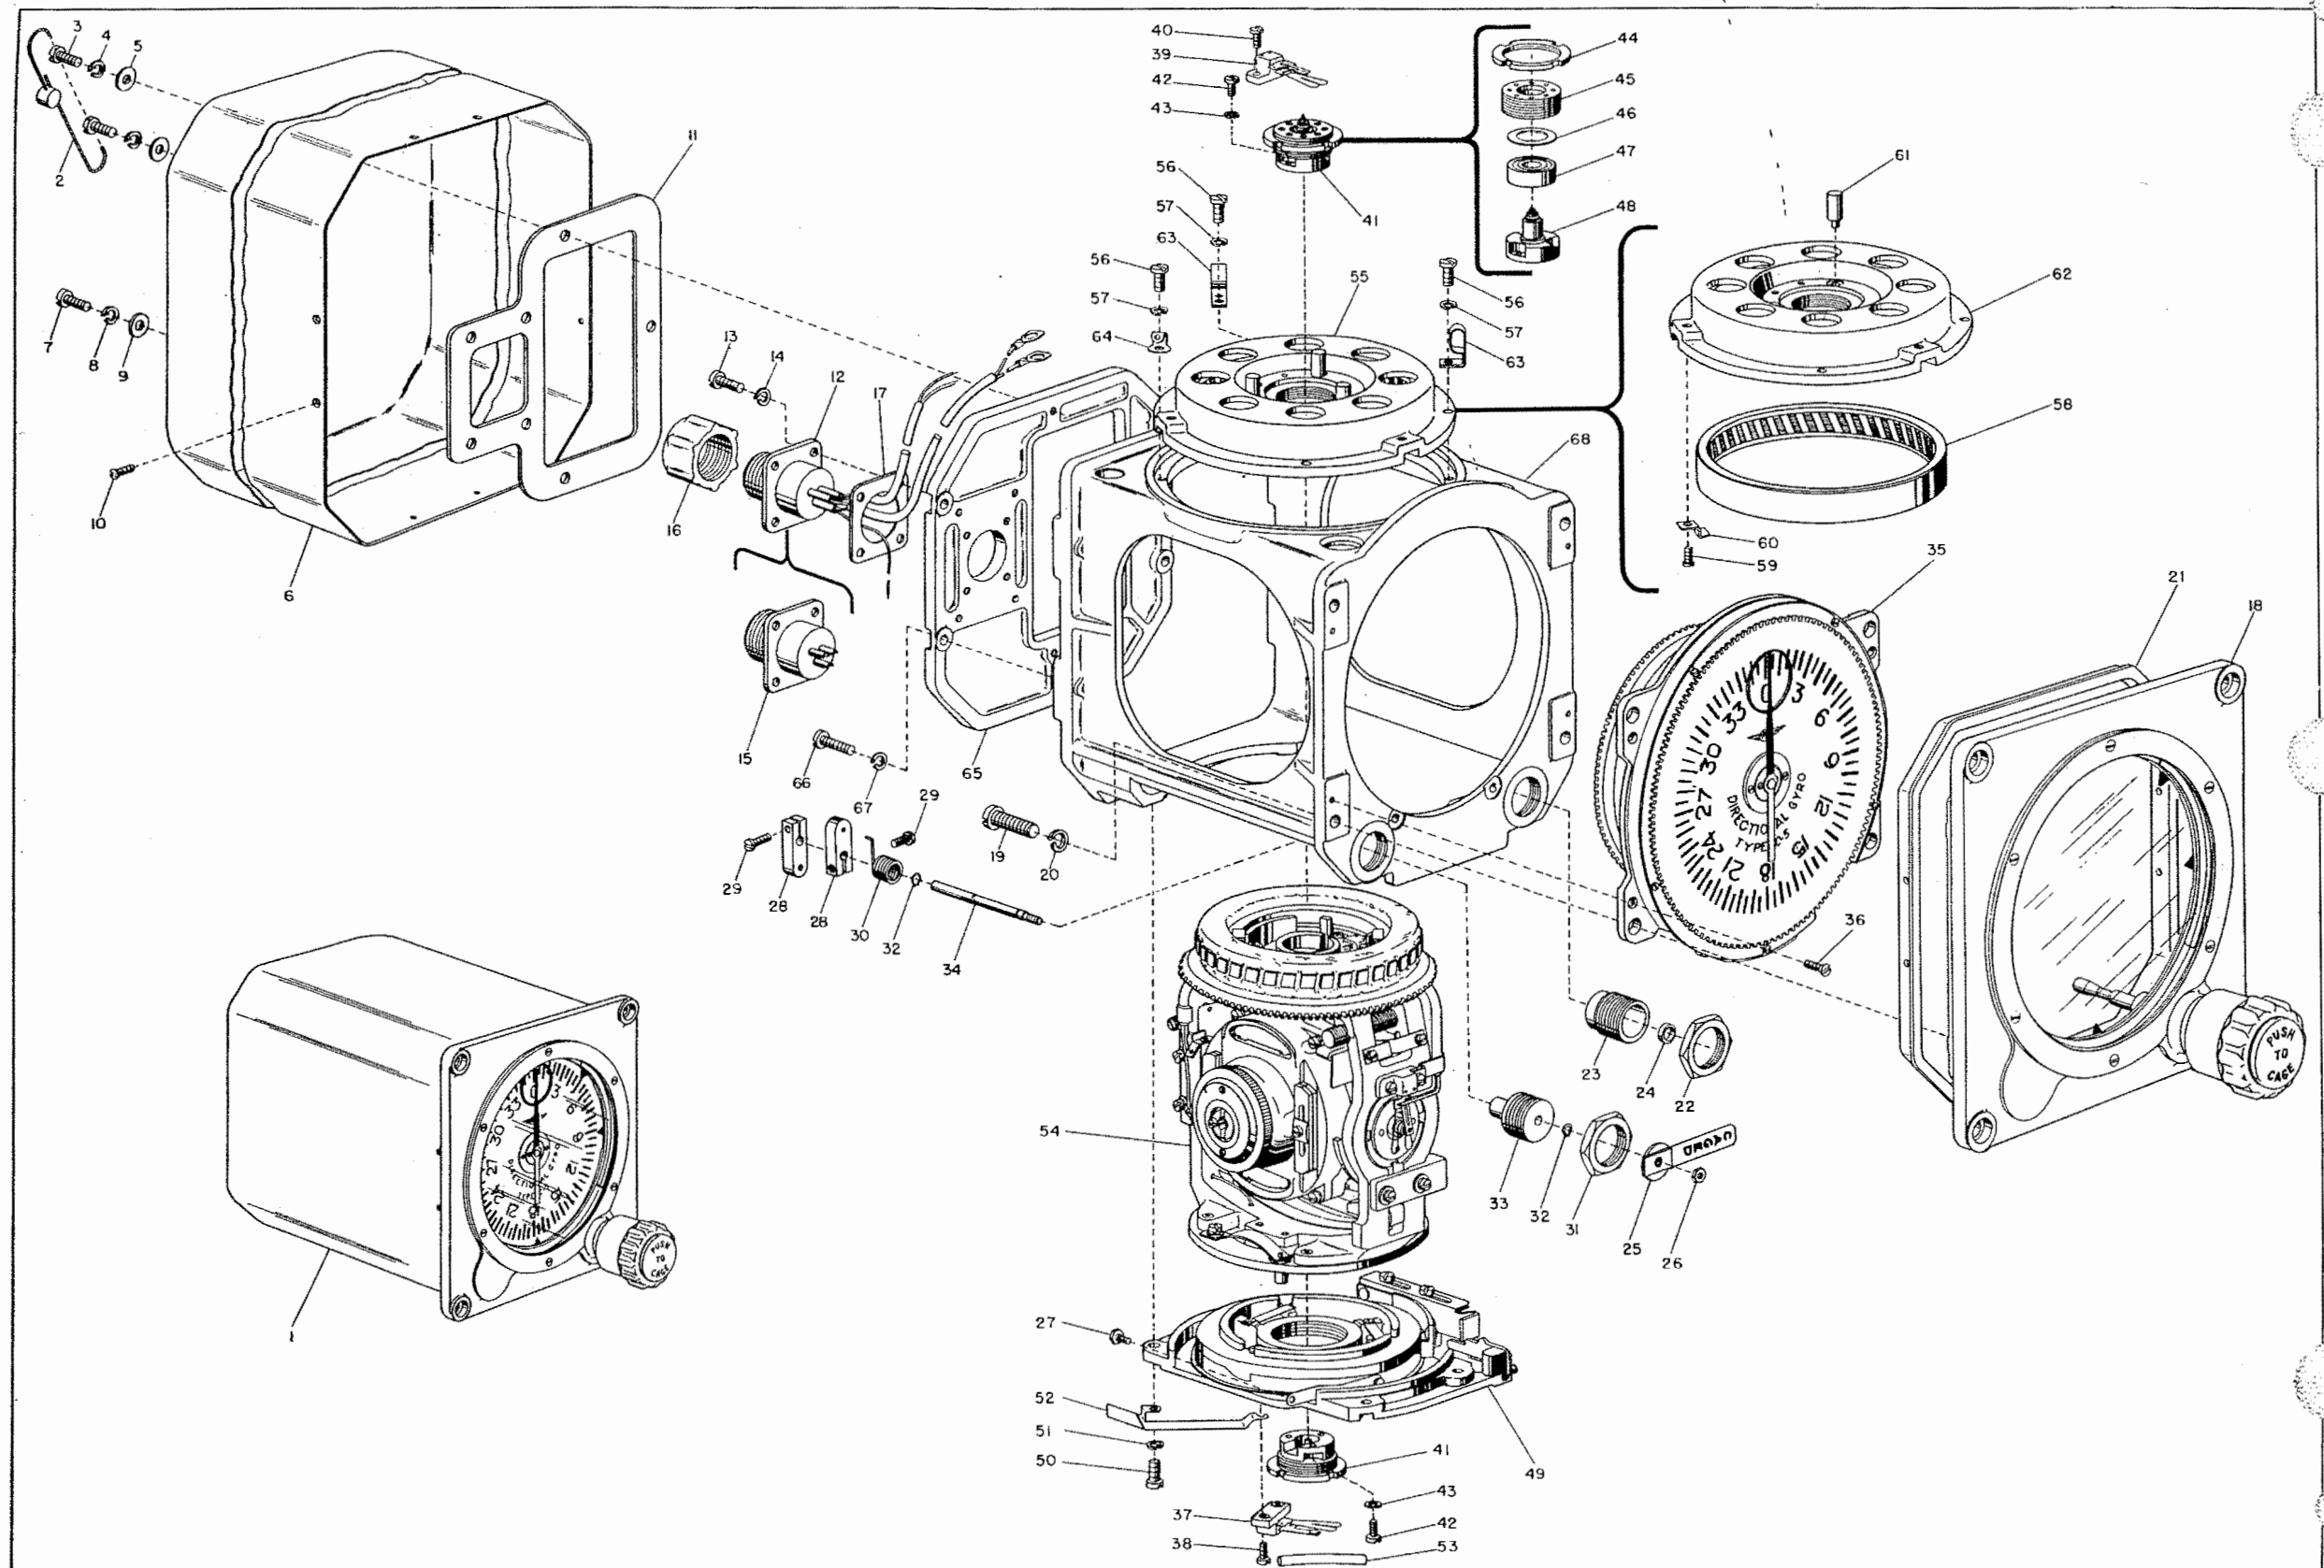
Type C-5 Directional Gyro Indicator Assembly
